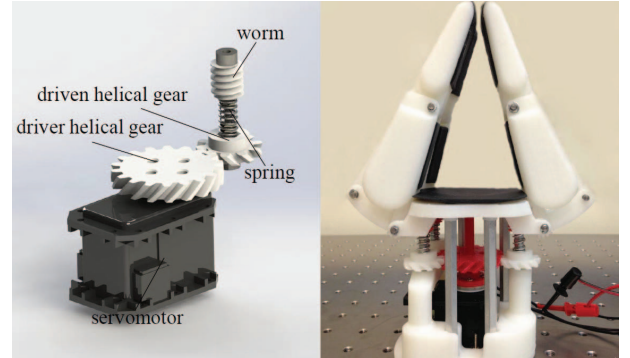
A 3D model and a prototype of the proposed breakaway clutch mechanism.
